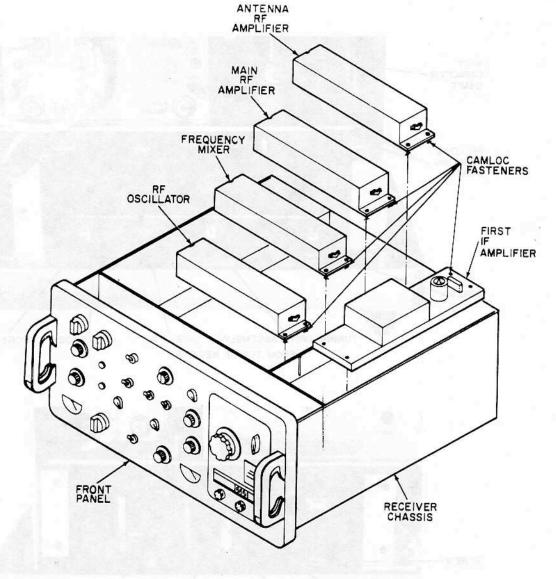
Removal of Assemblies from Bottom of Chassis
